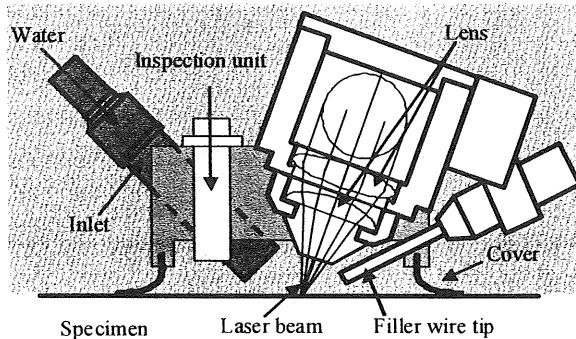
Schematic of laser peening with multifunction laser welding head
